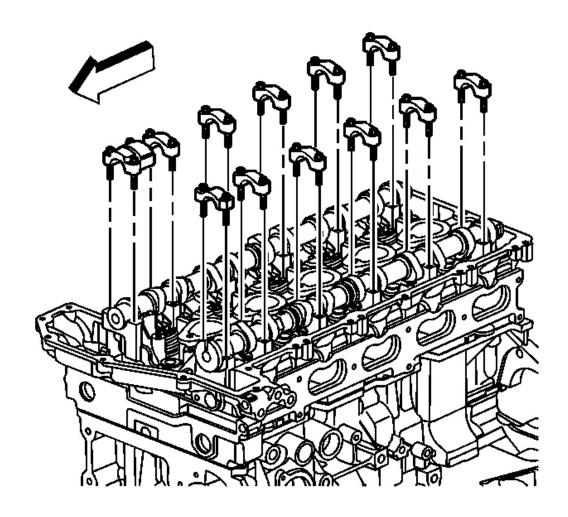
View Of Camshaft Caps Courtesy of GENERAL MOTORS CORP.
